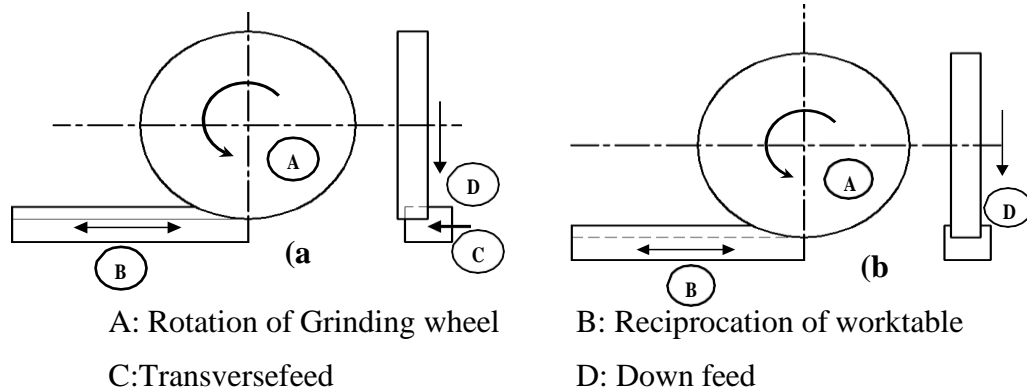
Surface Grinding (a) Traverse Grinding (b) Plunge Grinding
